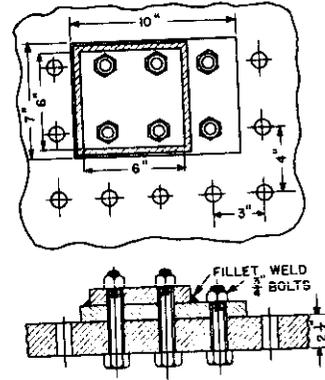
RESTRAINED FILLET-WELDED SPECIMEN FOR CRACKING TEST. (REEVE TEST).
